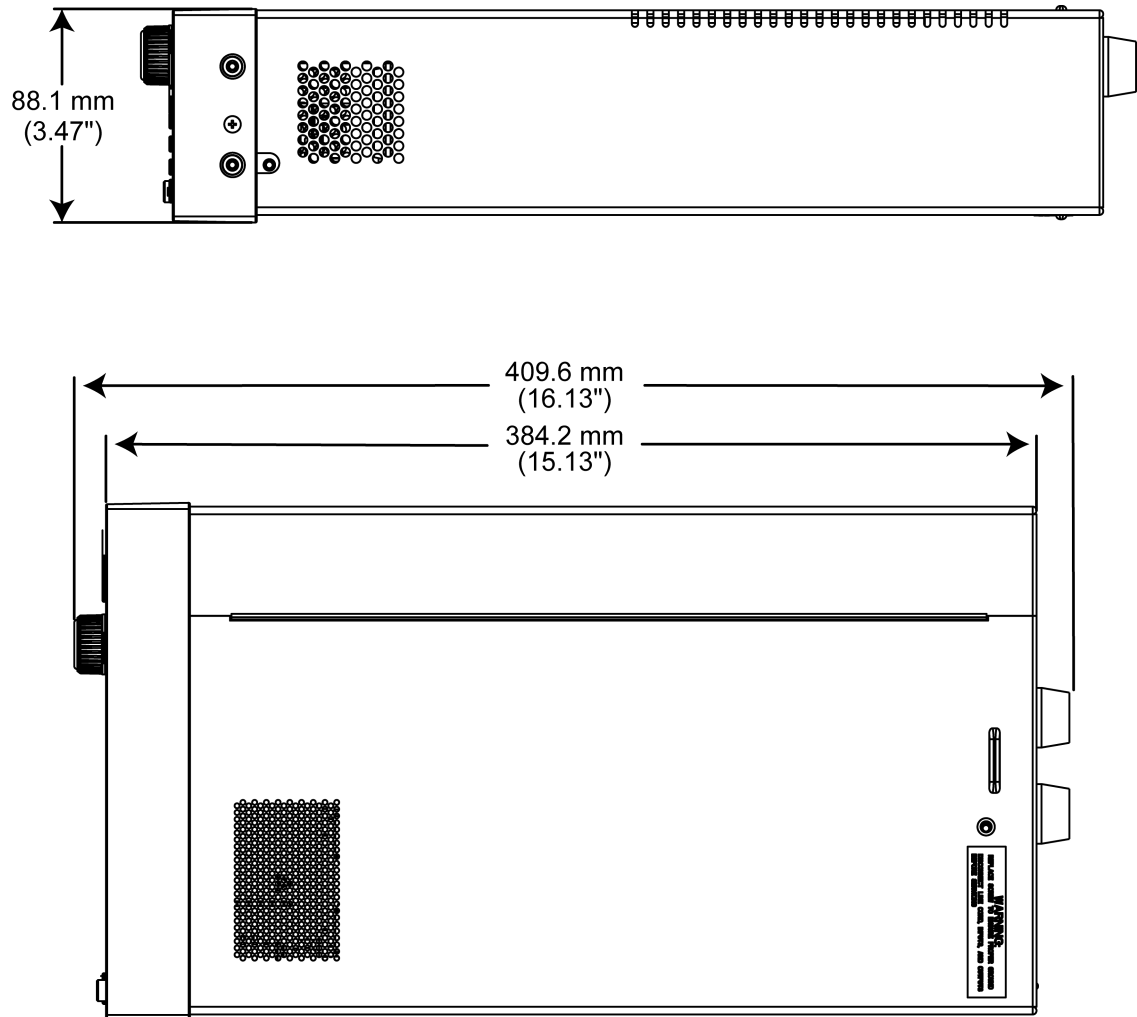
Model DMM7510 top and side dimensions with handle and bumpers removed
